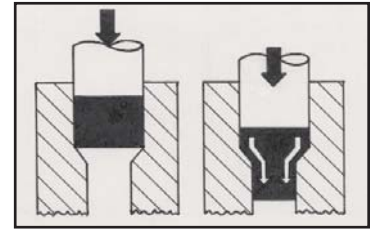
Forward extrusion, a basic cold forging process, reduces slug diameter while increasing length. Stepped shafts and cylinders are typical examples of this process.
